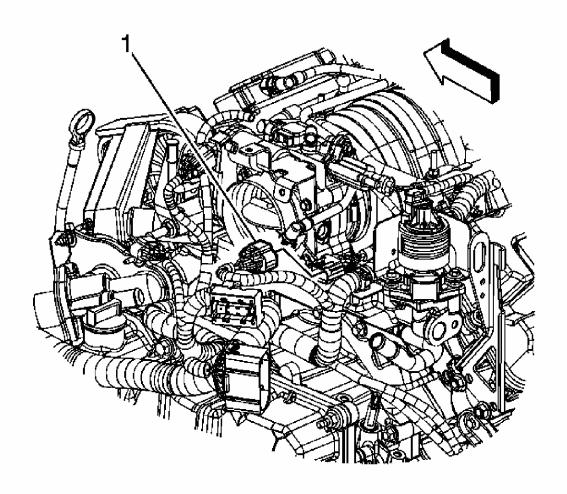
View Of Engine Harness Electrical Connectors Courtesy of GENERAL MOTORS CORP.
